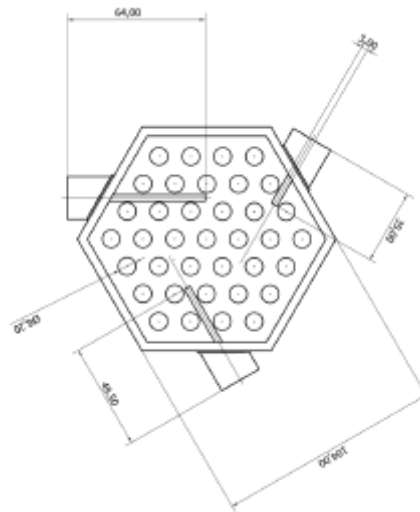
TCs arrangement at the inlet and outlet section of the FPS
